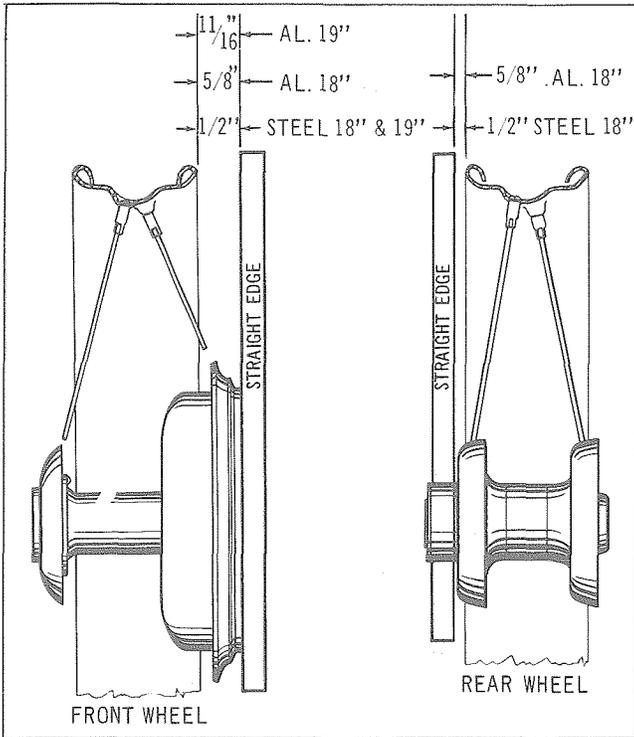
C-19. Aligning of Wheel with Straight Edge (1963 and Earlier)
